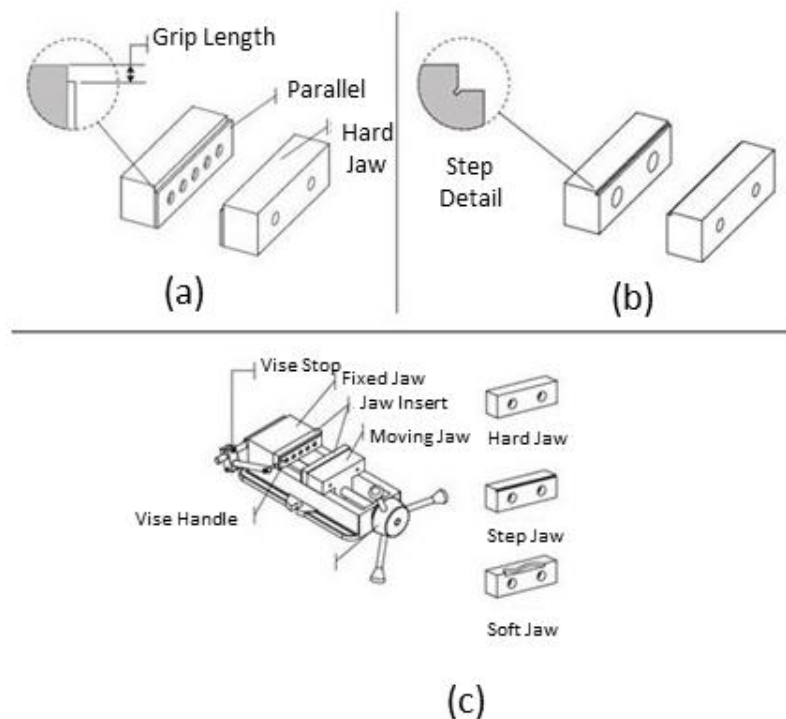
Hard Jaws (a) and Step Jaws (b); Milling Vise Components (c) [11]
